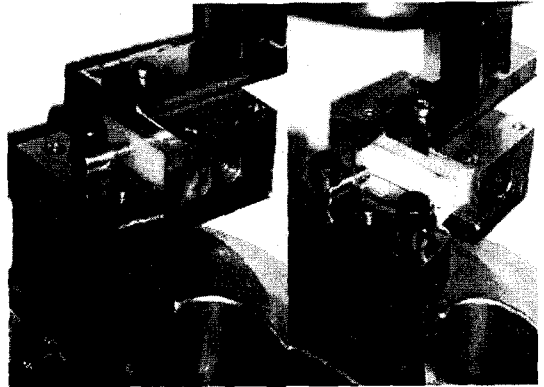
Single screw(L) and ULT(R) jig for fatigue
